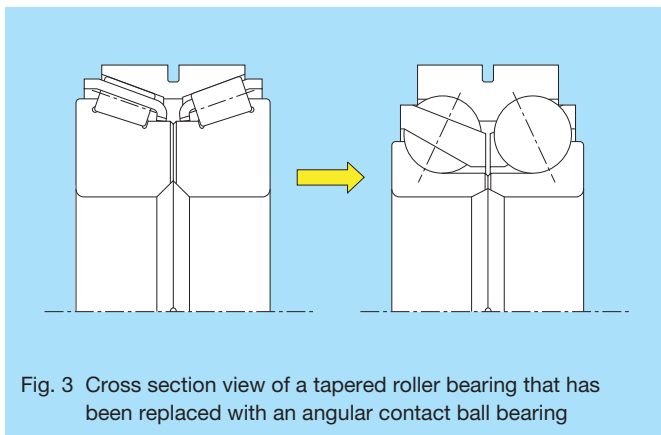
Cross section view of a tapered roller bearing that has been replaced with an angular contact ball bearing
